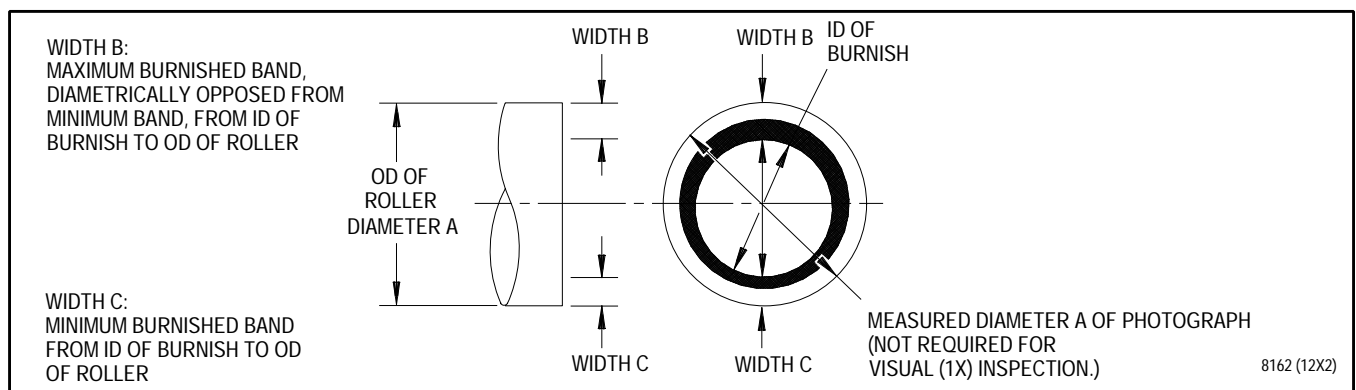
No. 4 Bearing Roller End Burnish - Photographic Inspection
